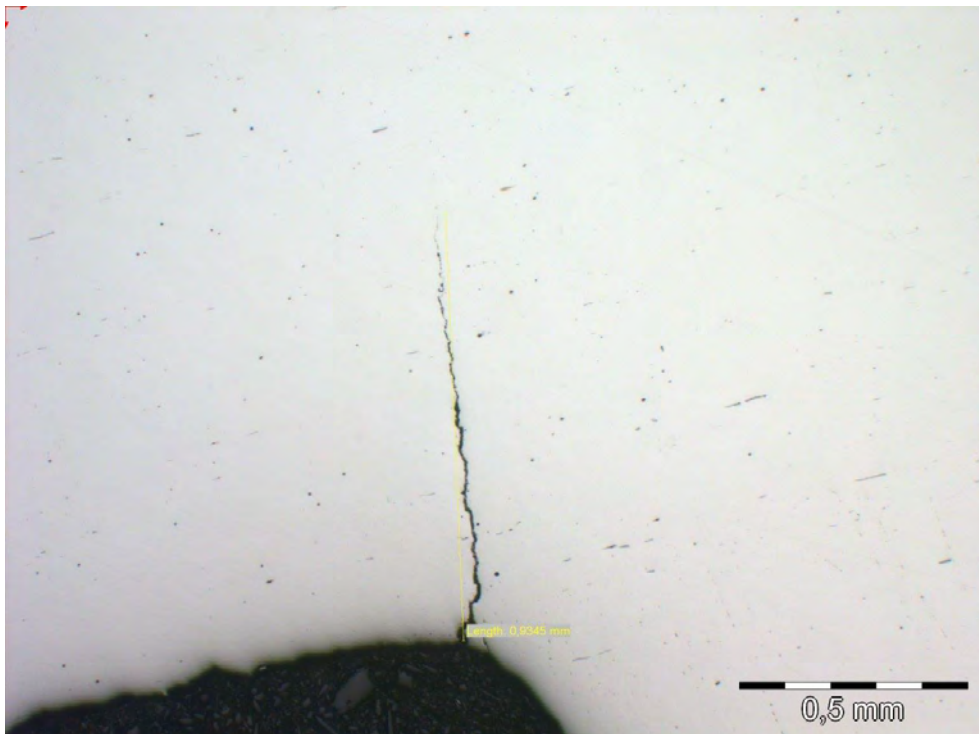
Crack at segment C, second ridge on barrel no. 1613
